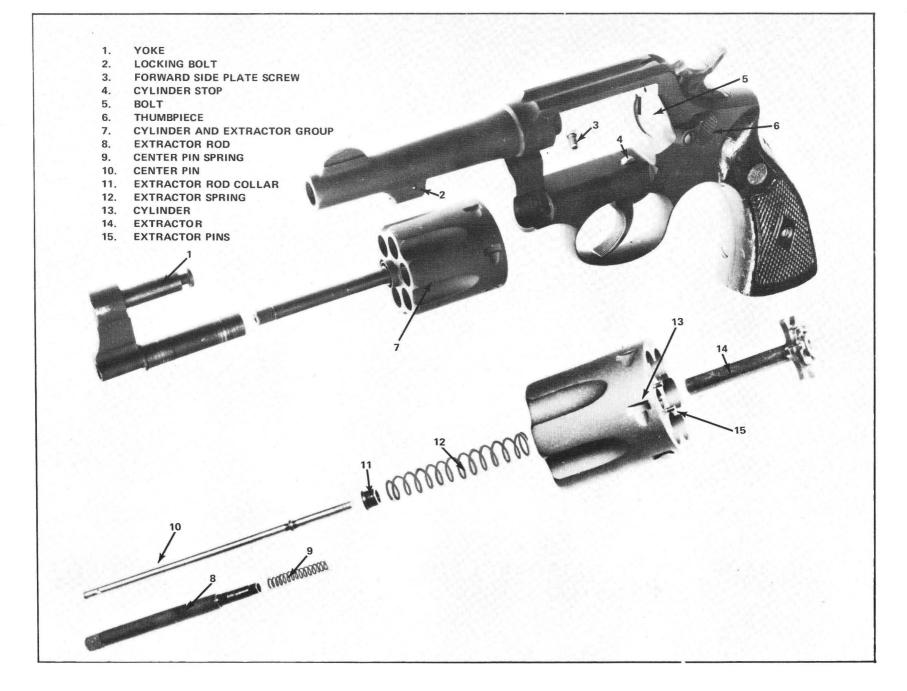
Forward Side Plate Screw, Yoke Cylinder and Extractor Group Disassembled From Receiver
